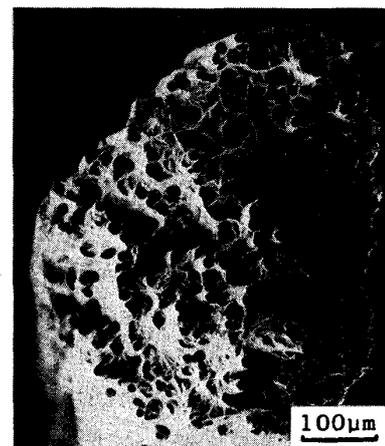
Fracture Surface of SiC/Al Preform Wire Bending Test Specimen.
